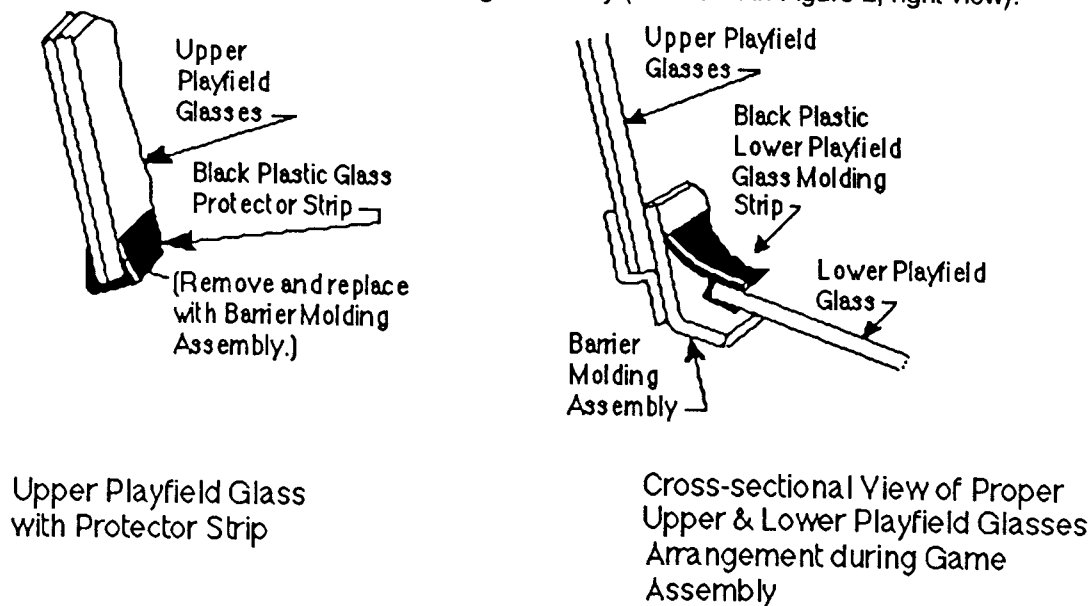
Upper & Lower Playfield Glasses Assembly Details
